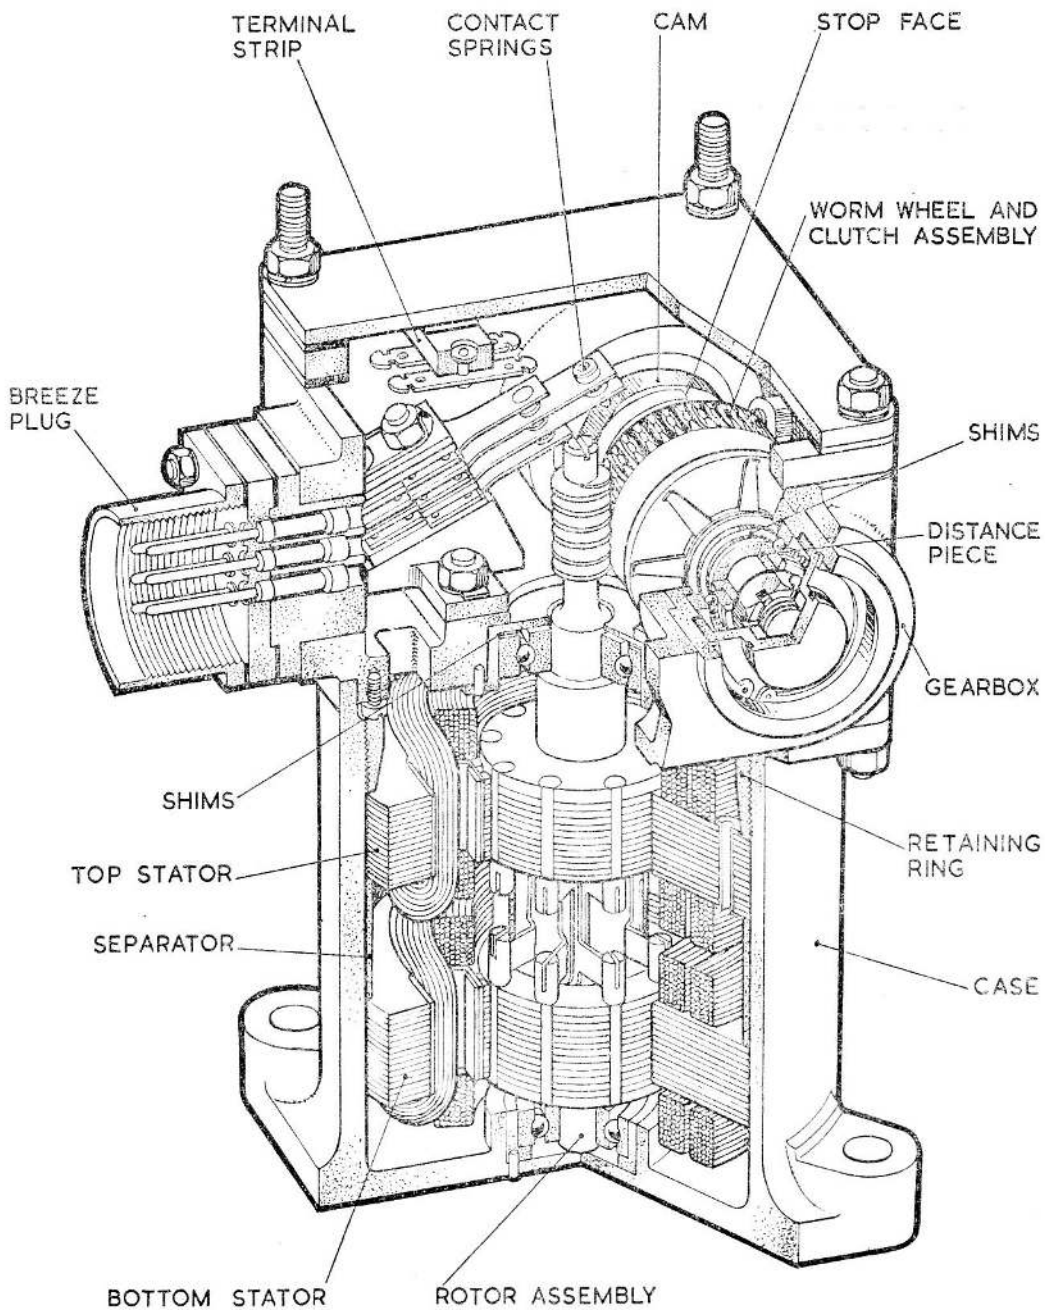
Sectional view of corrector unit, Rotor, Type SNC/19
